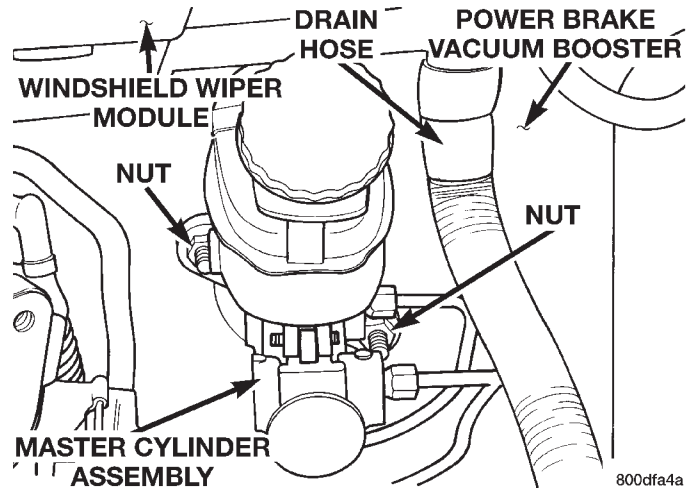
Master Cylinder Mounting To Vacuum Booster
